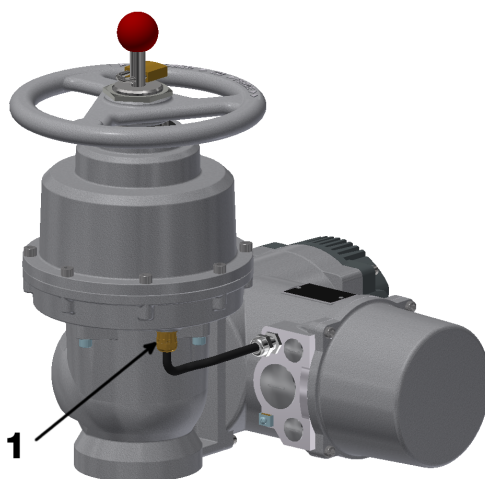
1...Cable gland on the failsafe assembly of the failsafe base actuator
